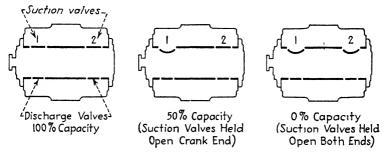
Three-step unloading by controlling inlet-valve operation. (Courtesy of Worthington Pump and Machinery Corp.)
